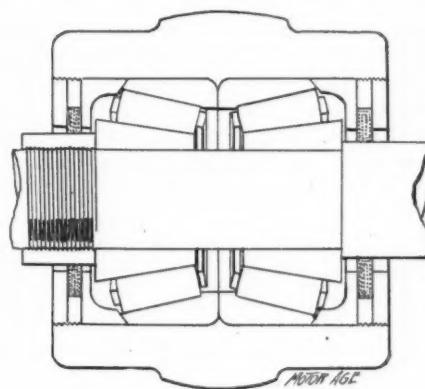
A Roller Bearing for One End of a Revolving Axle.
